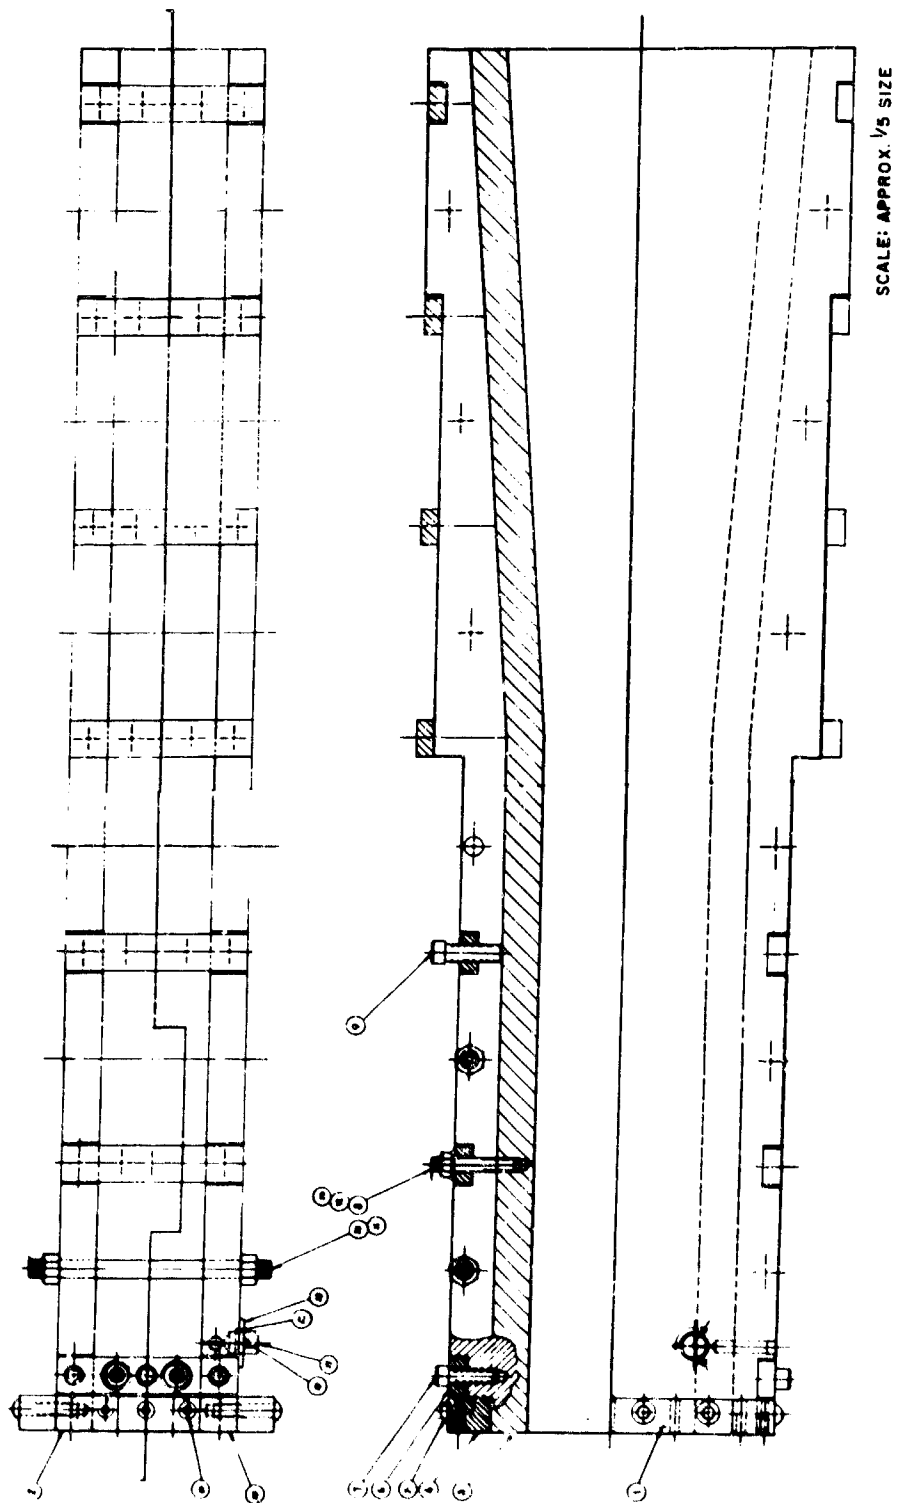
Assembly Drawing of the Supersonic Diffuser.
